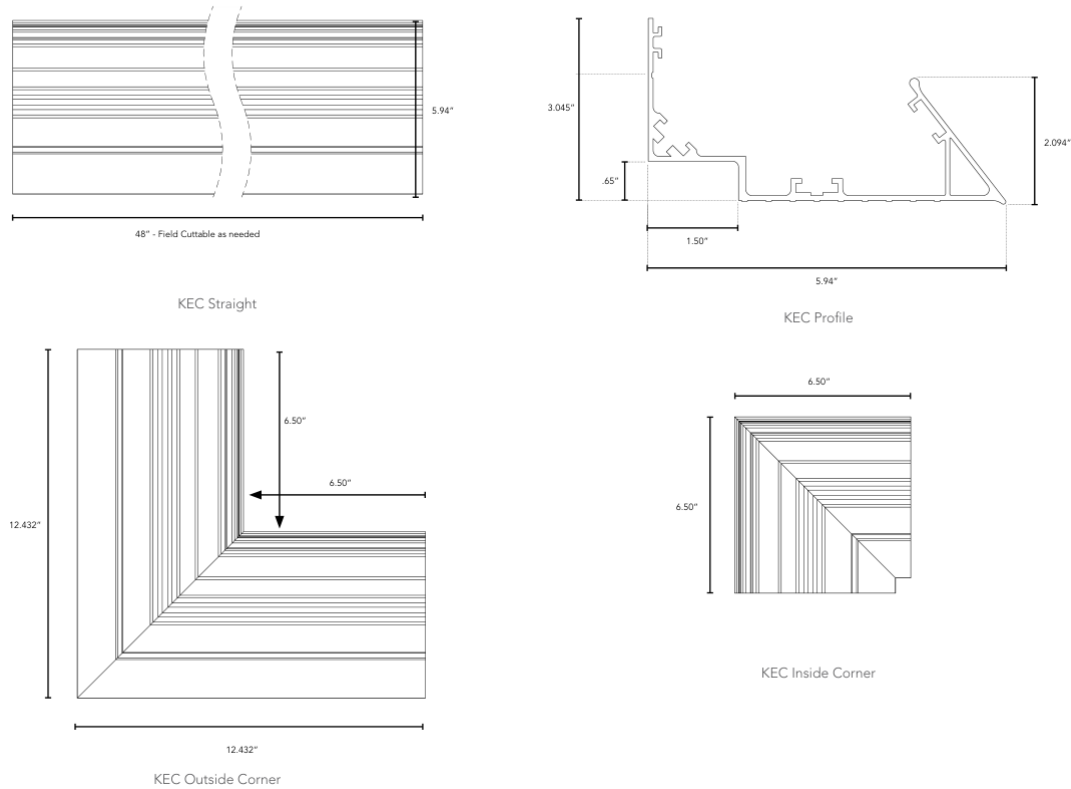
Dimensional reference for straight sections, profile, and corner components.
